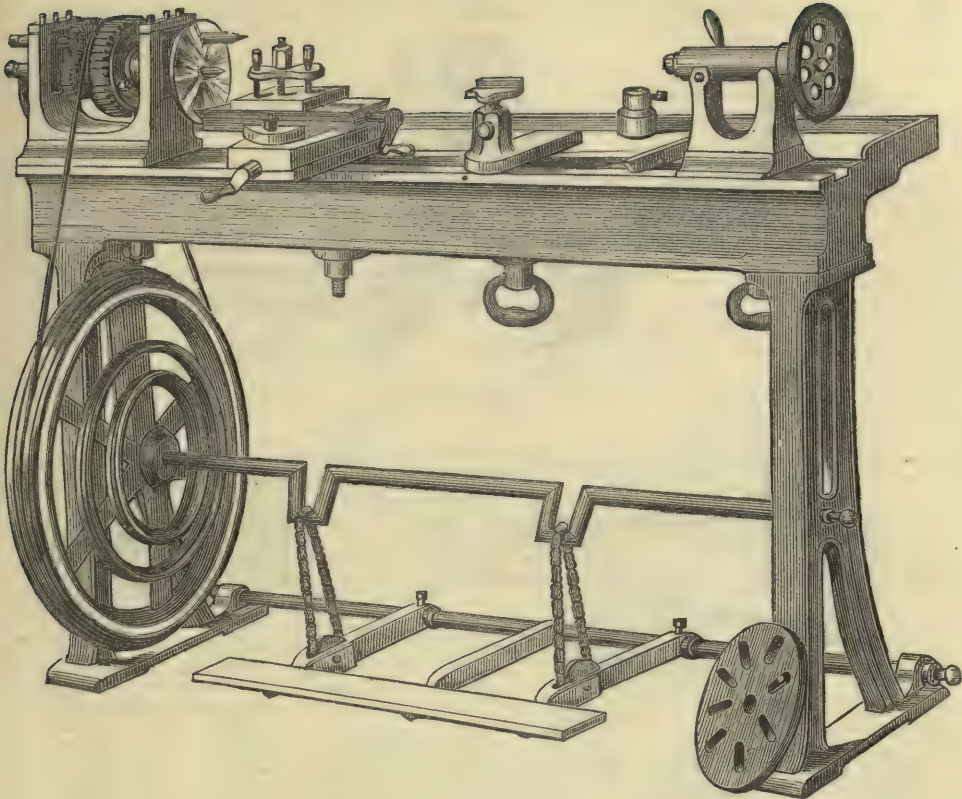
is of a single-gear foot-lathe, with planed bed, standards, anti-friction treadle, with chain, crank, and driving wheel, hand-rest, face-plate, drill-chuck, and two centres.
